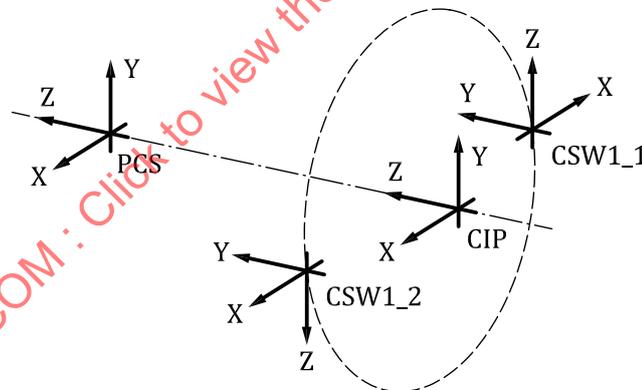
Face countersinking tool: mounting coordinate systems CWS
